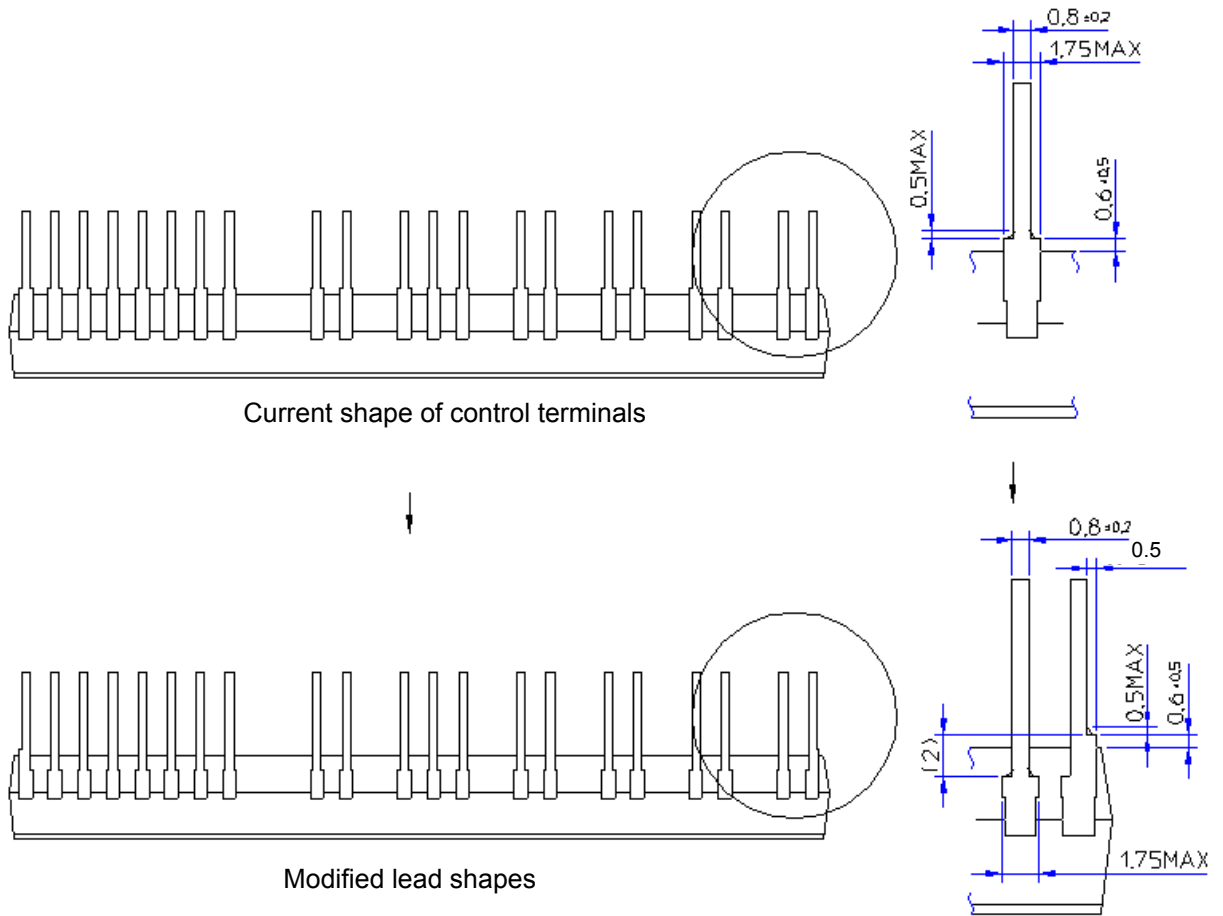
Terminal shape modification of Package A type large DIP-IPM (control side)
